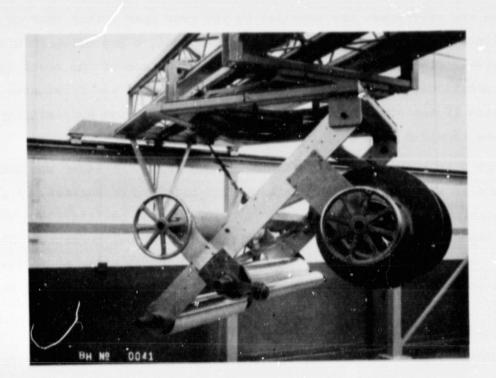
View of Head Showing Pressure Roller and Paper Takeup Roller
